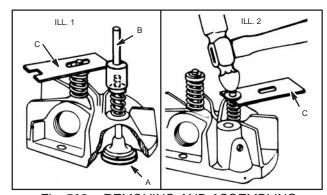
REMOVING AND ASSEMBLING VALVES MODEL FH
